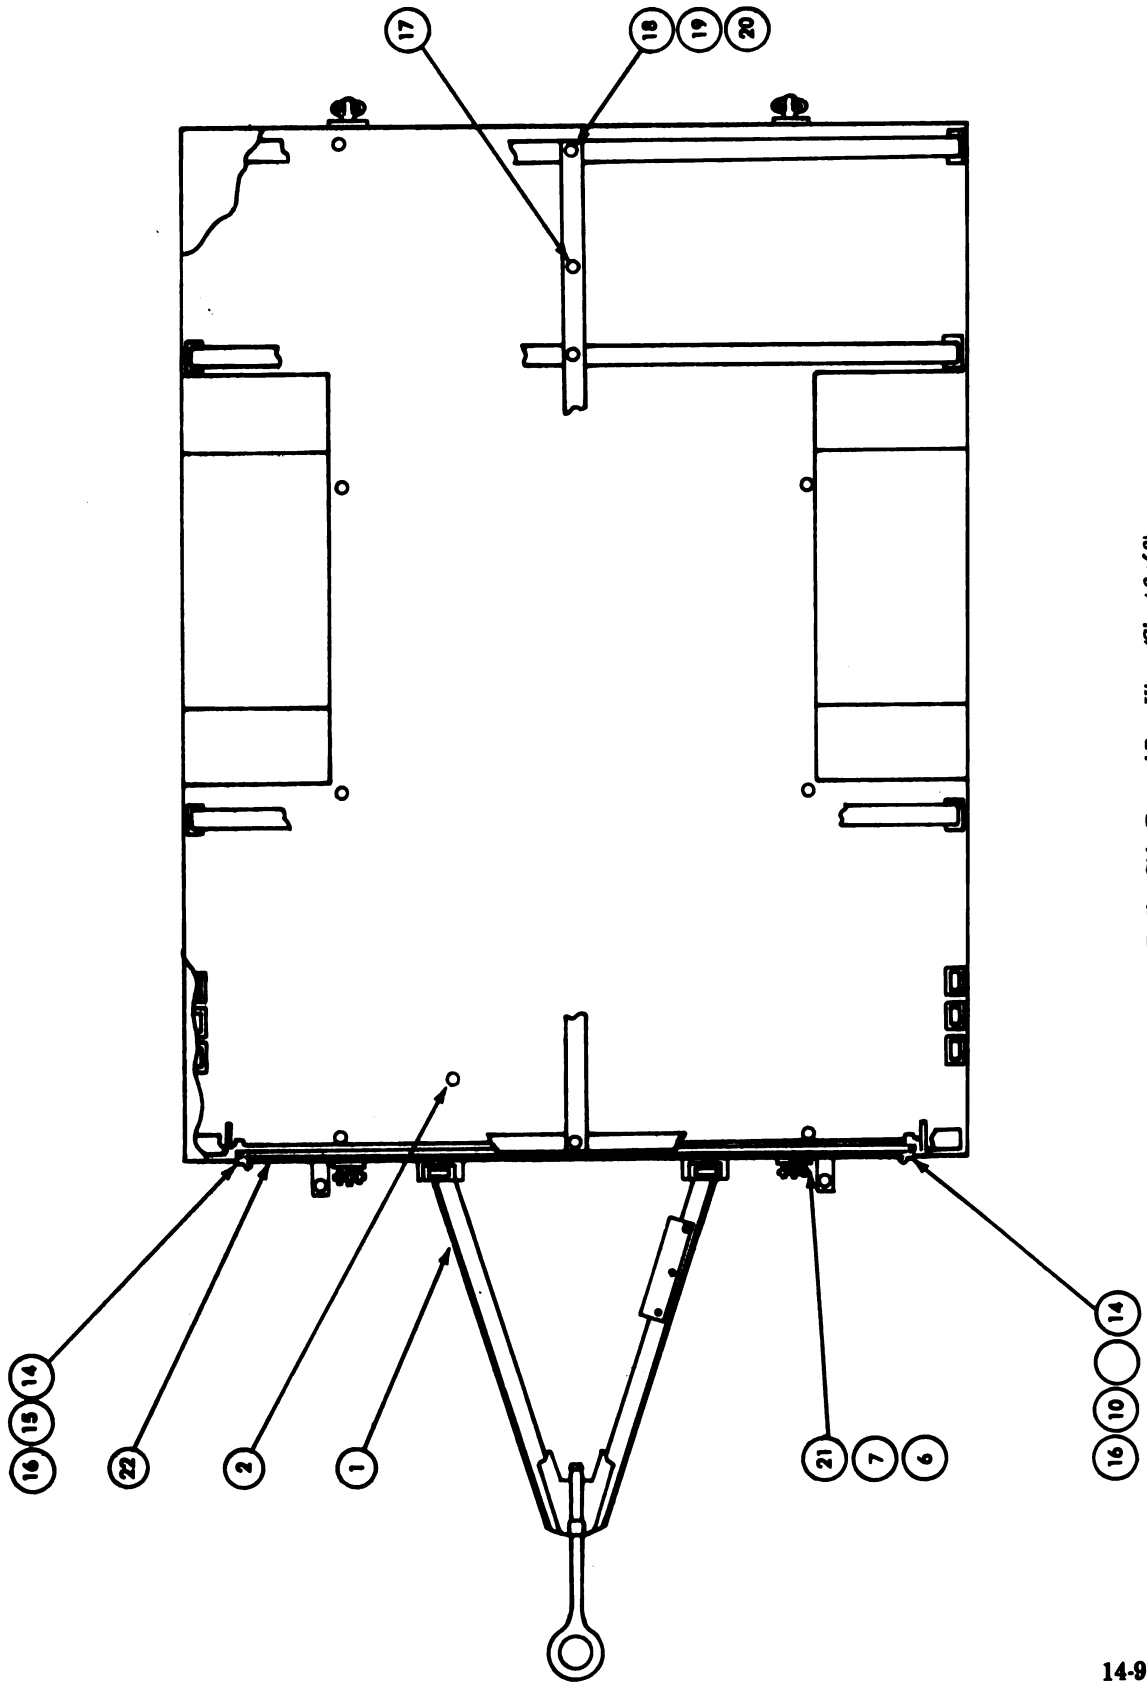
Trailer, Side, Top and Rear Views (Sheet 3 of 3)
